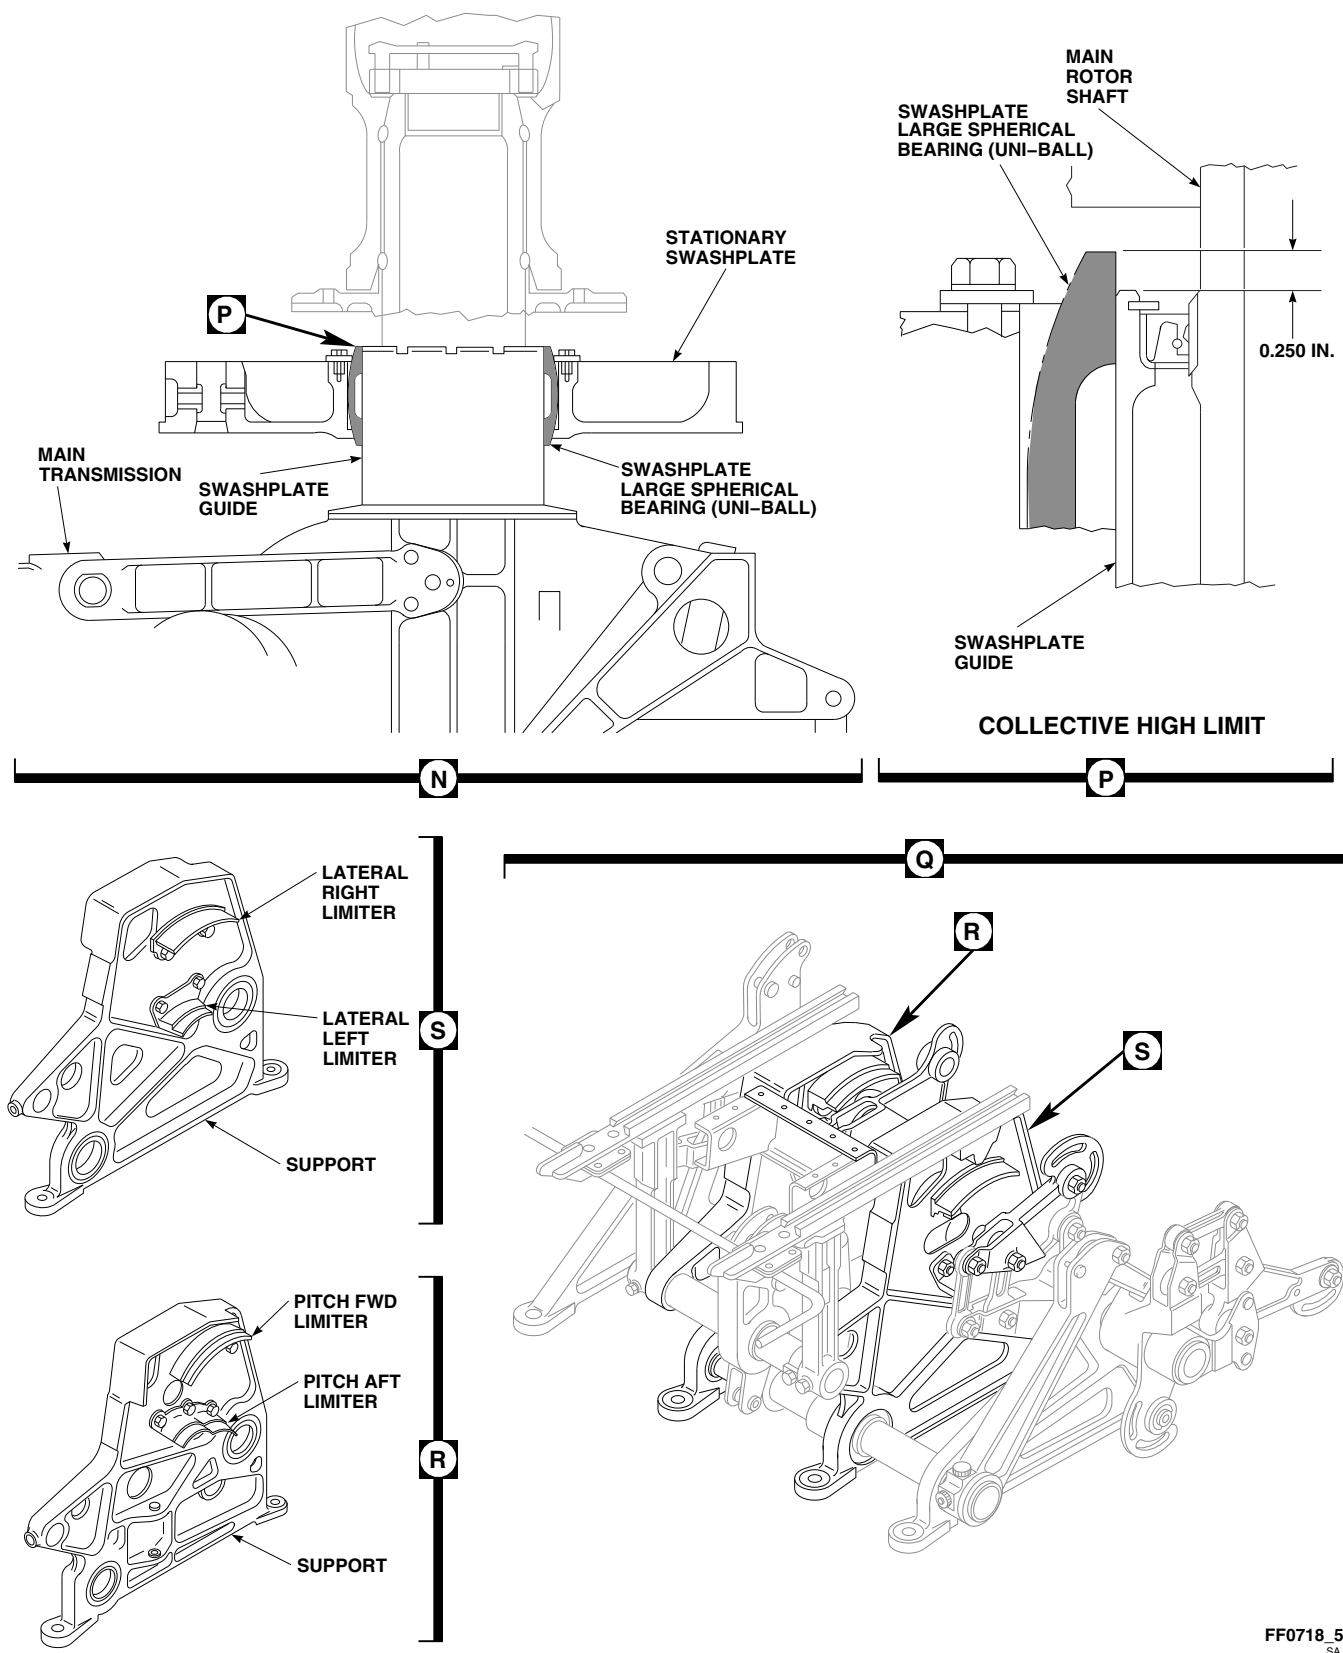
RIG MAIN ROTOR SYSTEM (SHEET 5 OF 6)
